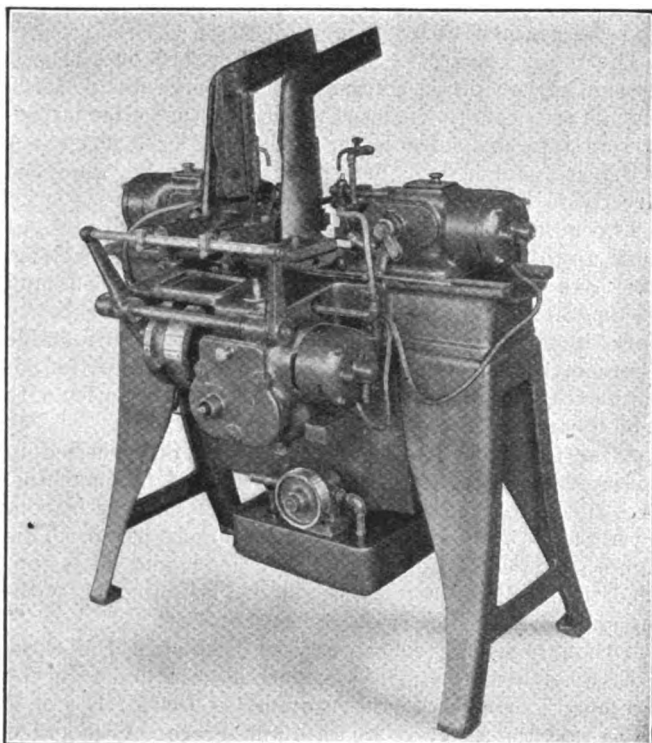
REAR VIEW OF AUTOMATIC CENTERING MACHINE
